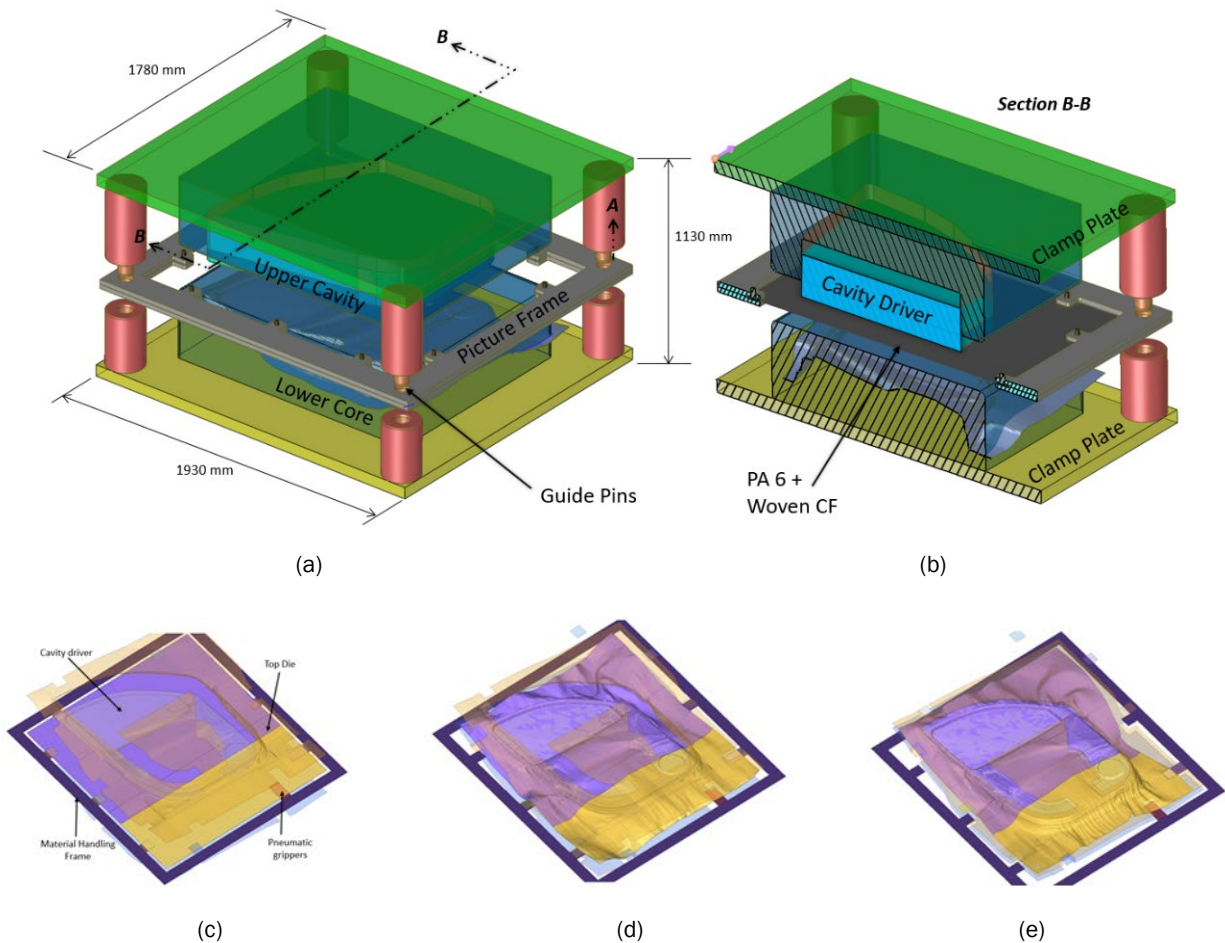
(a) Initial tool concept of inner beltline stiffener. (b) Thermoforming simulation of inner beltline stiffener. (c) Before forming. (d) Cavity driver touch lower tool. (e) Tool closed condition. Source: Clemson University.
